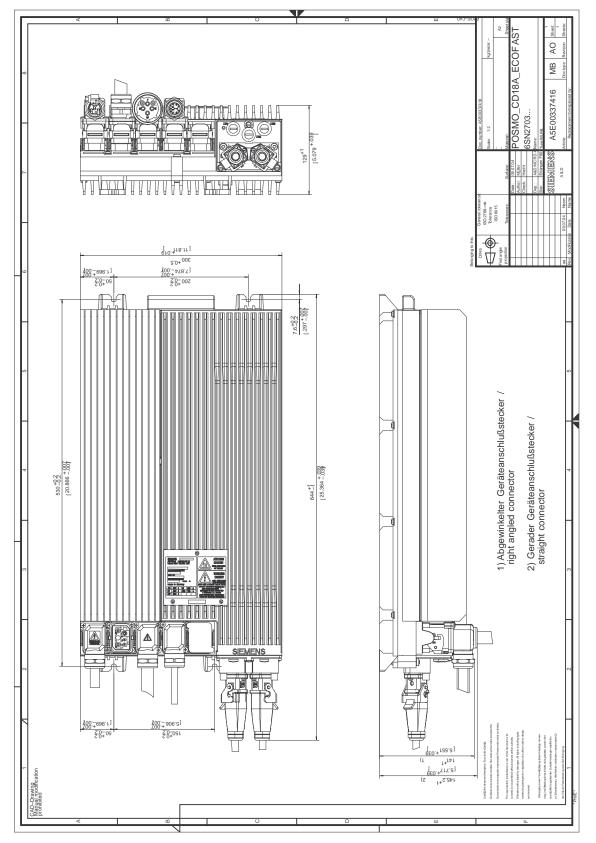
Dimension drawing POSMO CD 18 A ECOFAST
